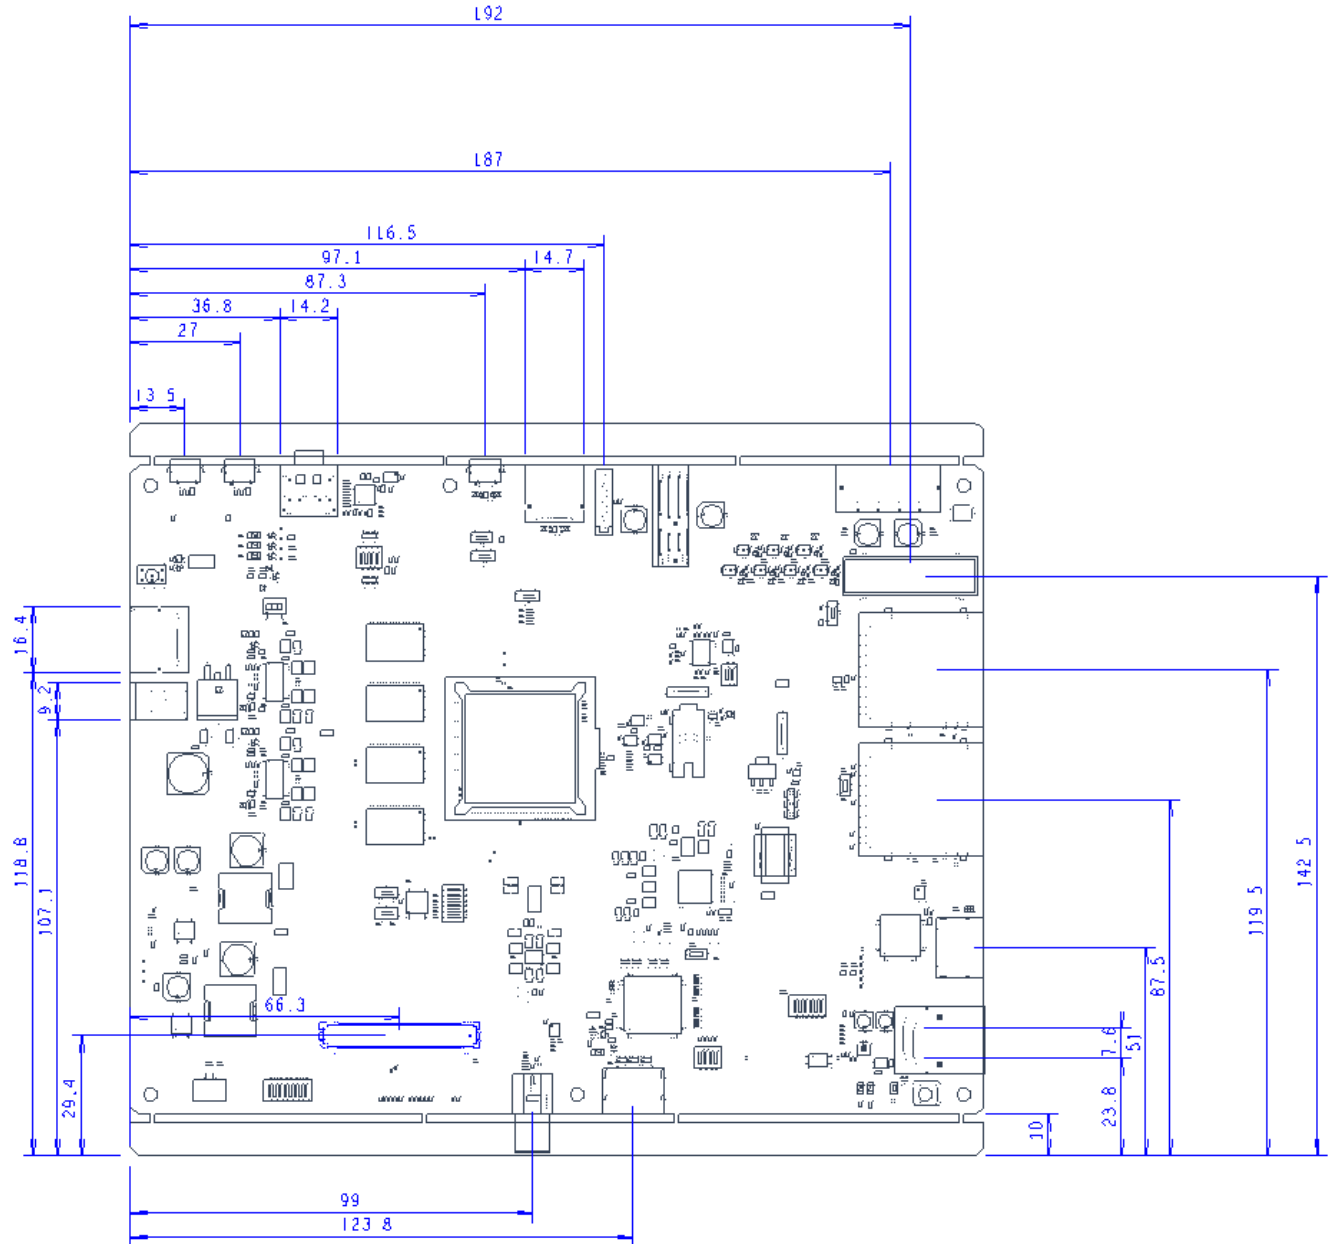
Connector Locations of the GOSE board (Component Surface) (Top View)
